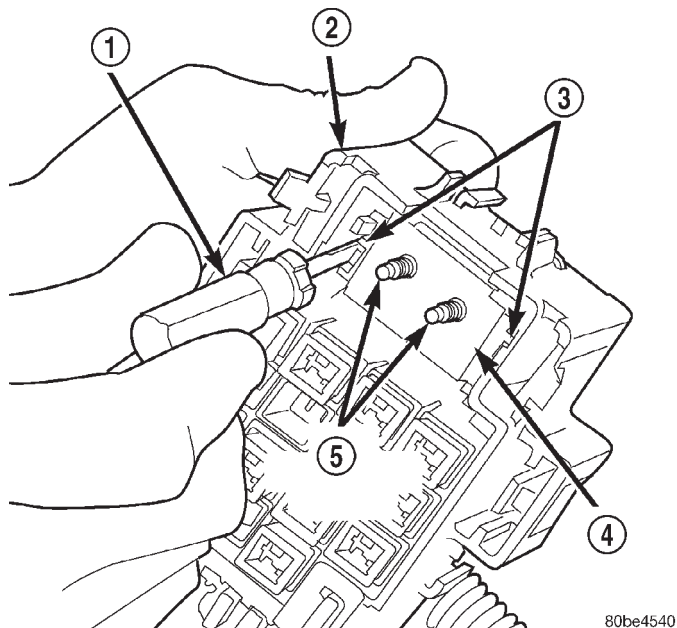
PDC Housing Lower Cover Remove/Install - Typical
